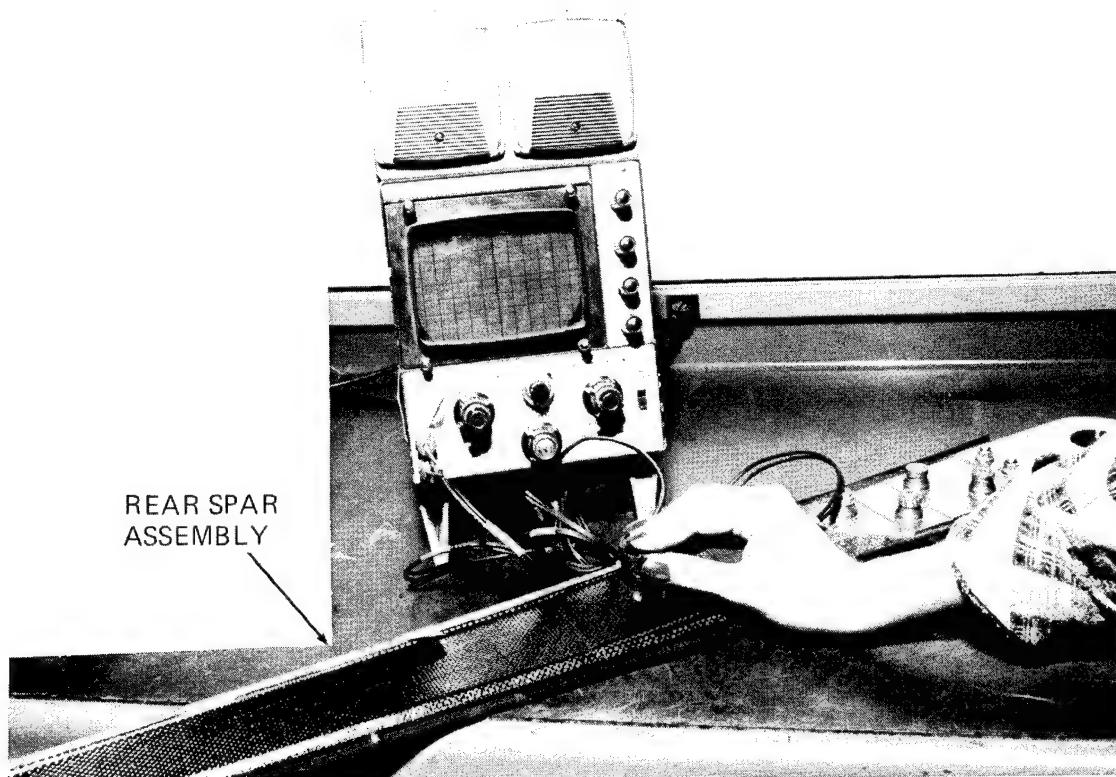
Sondicator Inspection of Rear-Spar Assembly
